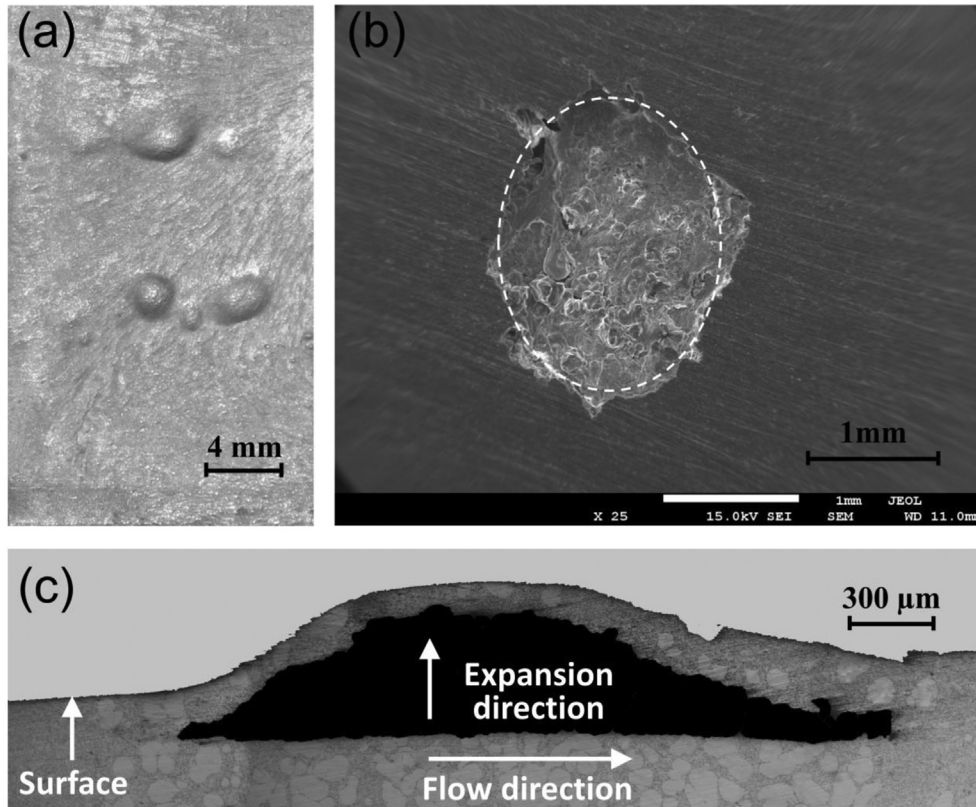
Typical morphology of (a) surface blisters, (b) view of the interior of a gas pocket with the blister cap removed and (c) side view of a gas pocket in a 319 s alloy semi-solid casting.
